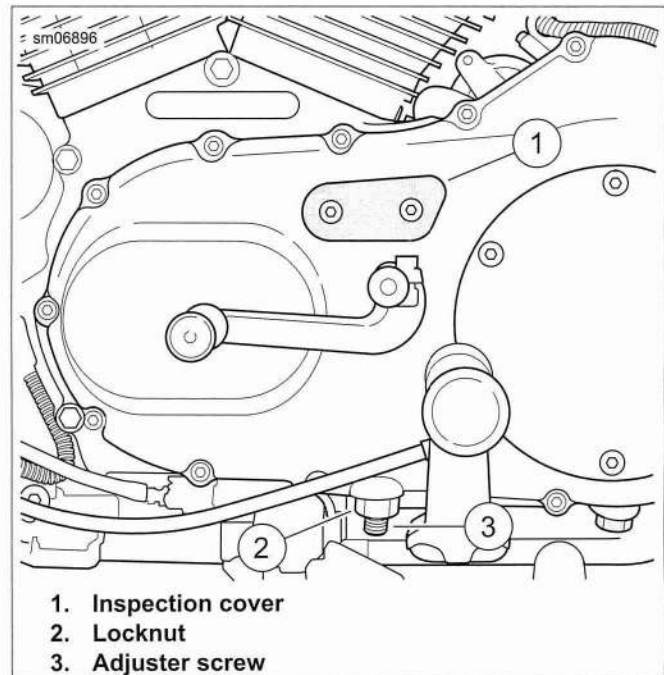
Primary Chain Inspection Cover and Adjuster
